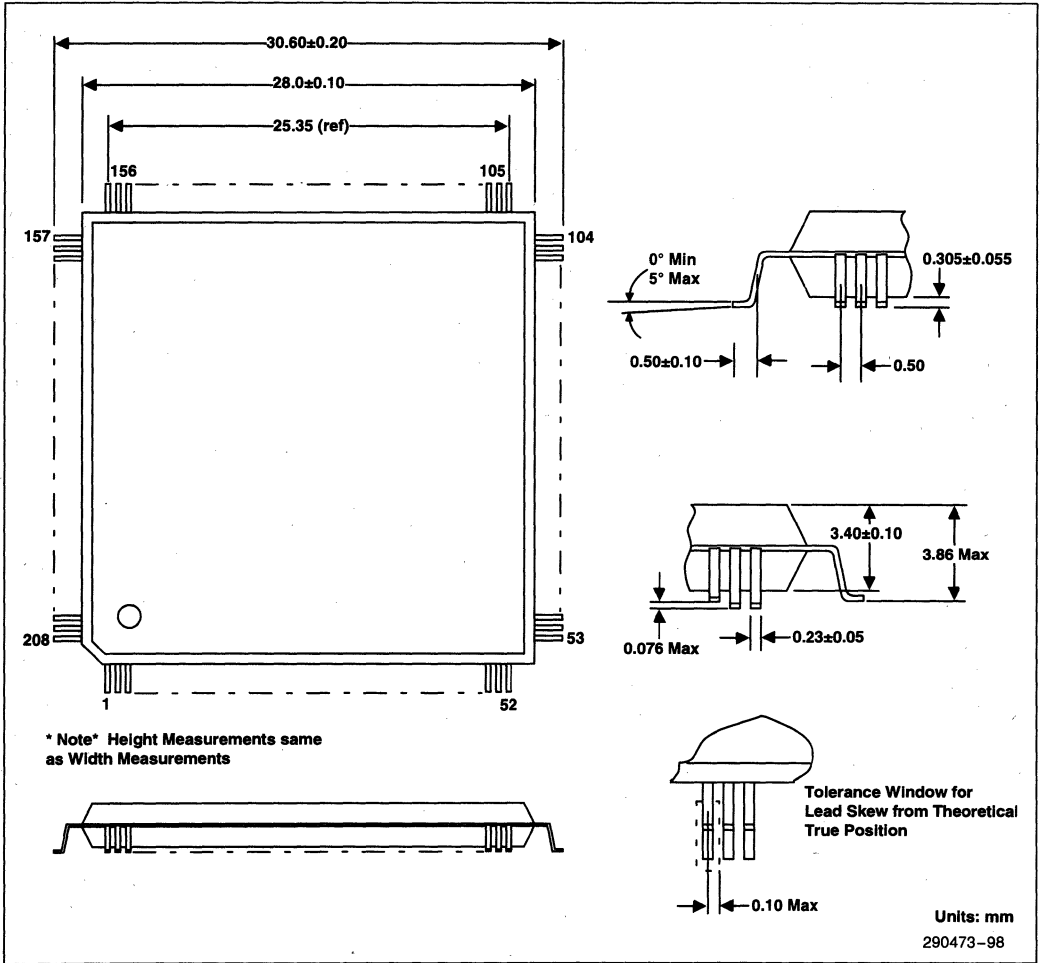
208-Pin Quad Flat Pack (QFP) Package Dimensions
